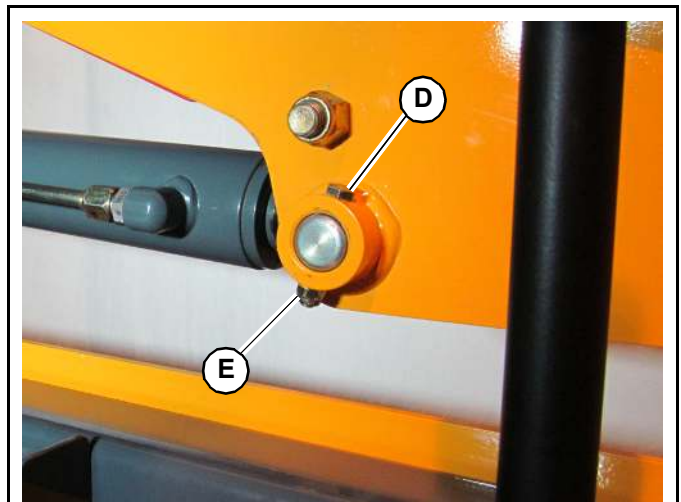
Rod End Pivot Pin, Cap Screw, and Locknut
